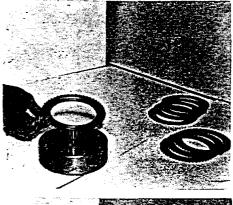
(Applies To Models With Four-Plate Clutches Only) Lower the pressure plate (Part #7172) into the clutch cylinder, smooth sid up.
